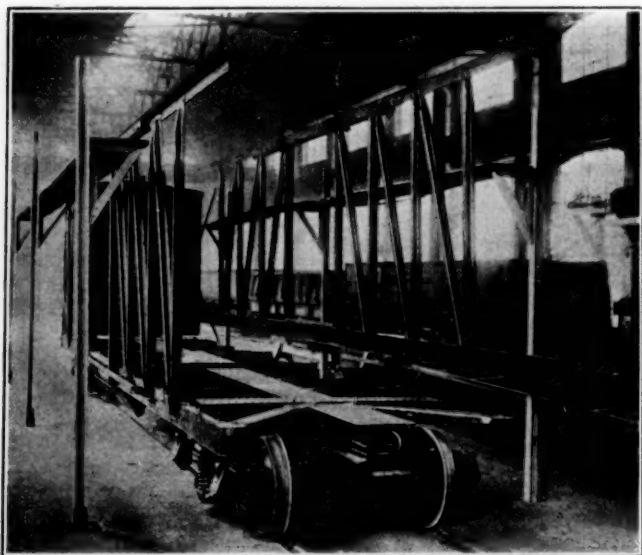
PLACING THE SIDE FRAMES IN POSITION
